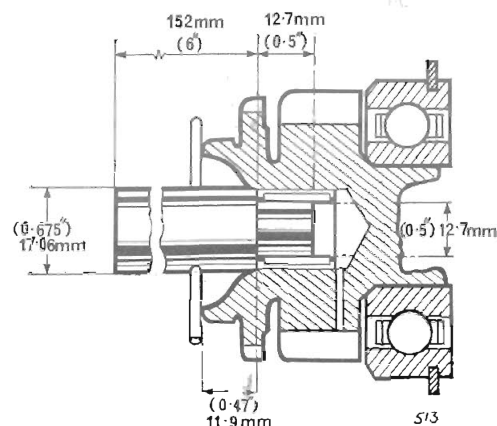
Details of drift used for driving the needle bearing into the pinion
